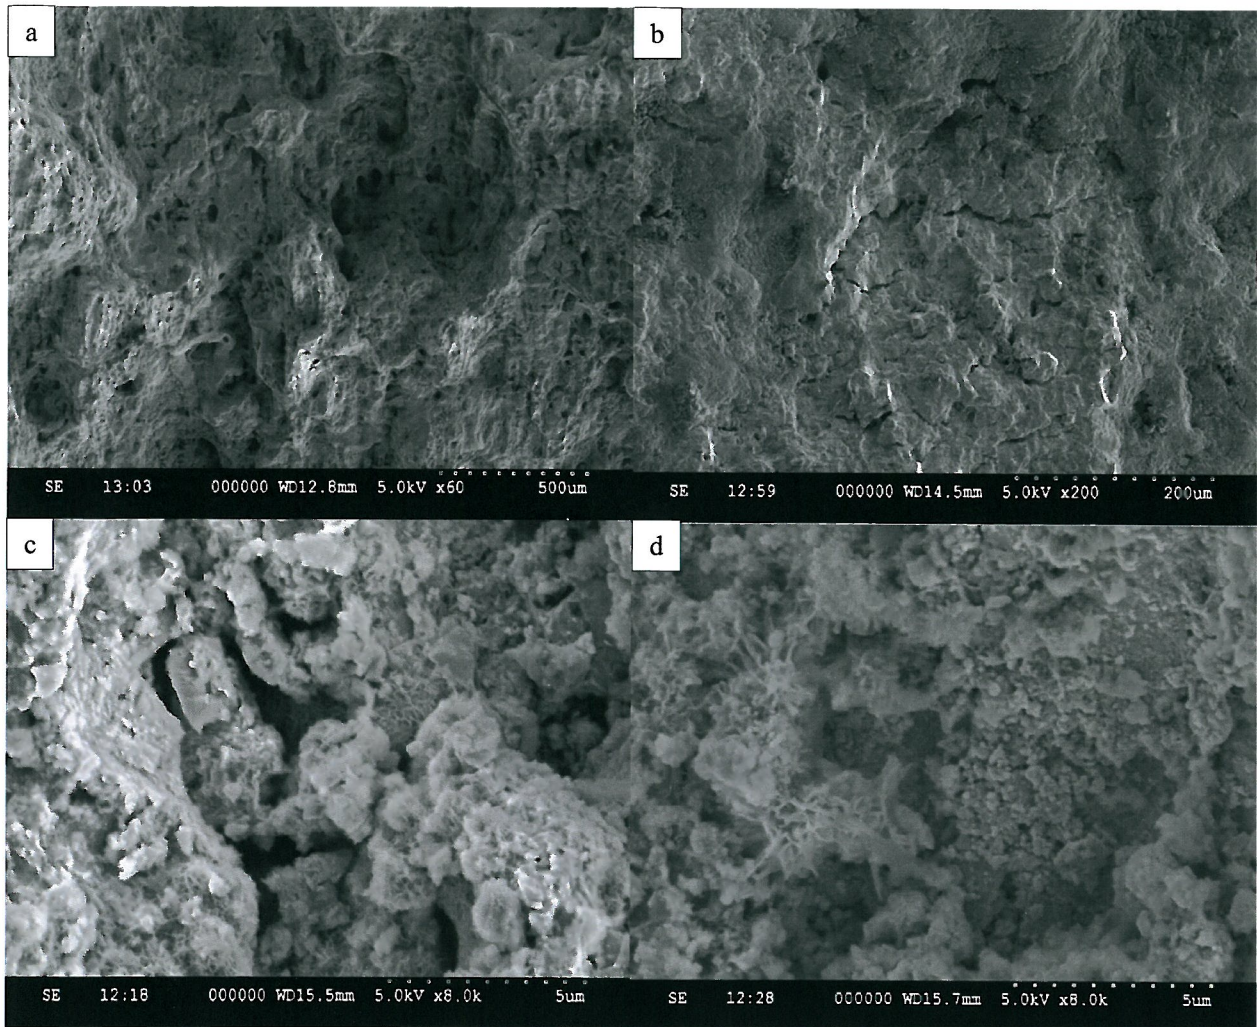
a: SEM image at the final fracture, showing a dimpled fracture surface. b: SEM image towards the final fracture showing micro cracks. c-d: SEM image of corroded and contaminated fracture surface.
